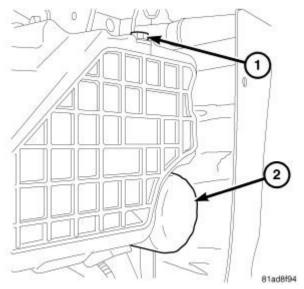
ENGINE OIL FILTER AND COOLER Courtesy of CHRYSLER LLC
